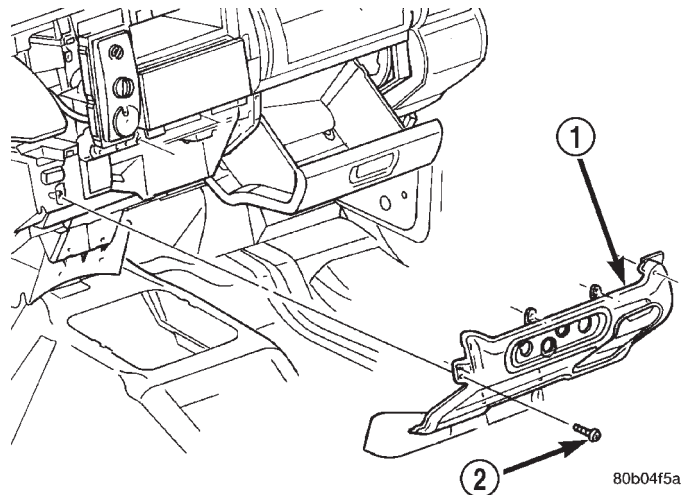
Instrument Panel Lower Bezel Remove/Install - Typical
